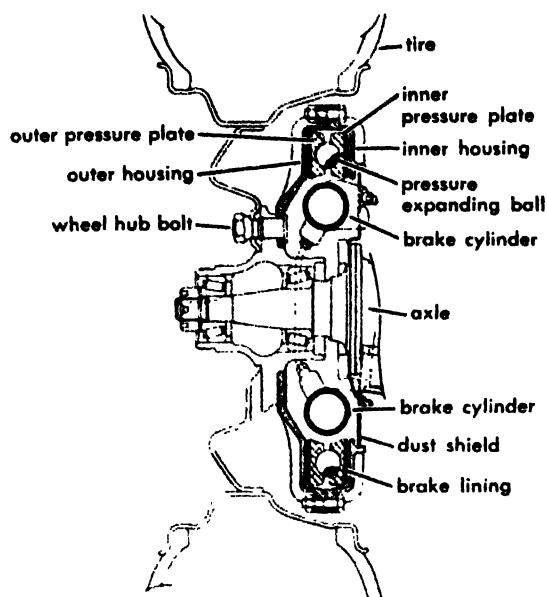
Sectional view of disk-brake assembly. (Chrysler Sales Division, Chrysler Corp.)
